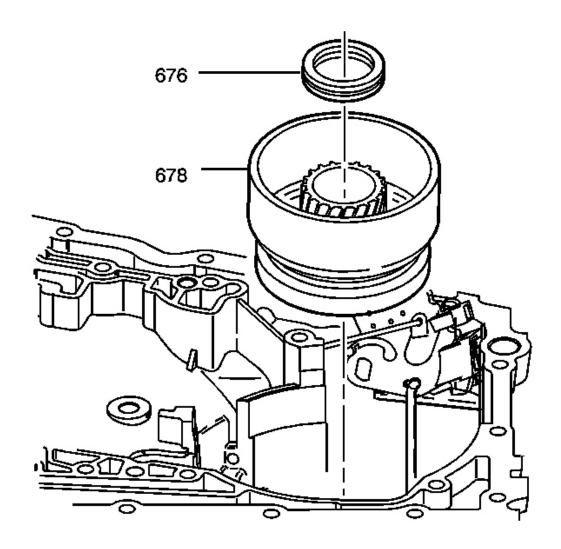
Identifying Reaction Sun Gear Assembly & Thrust Bearing Courtesy of GENERAL MOTORS CORP.
